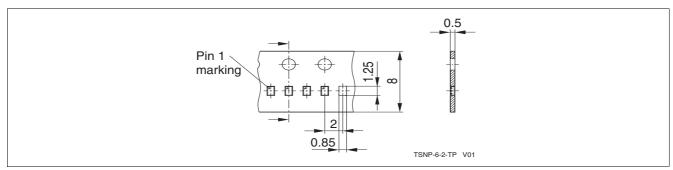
Tape & Reel Dimensions (reel diameter 180 mm, pieces/reel 15000)
